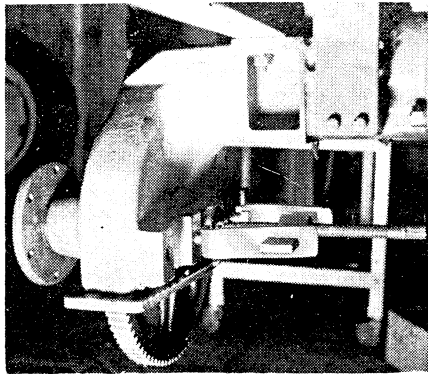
Removing Pony wheel axle shaft and bull gear. Puller screws are threaded into drawbar mounting holes in housing.
